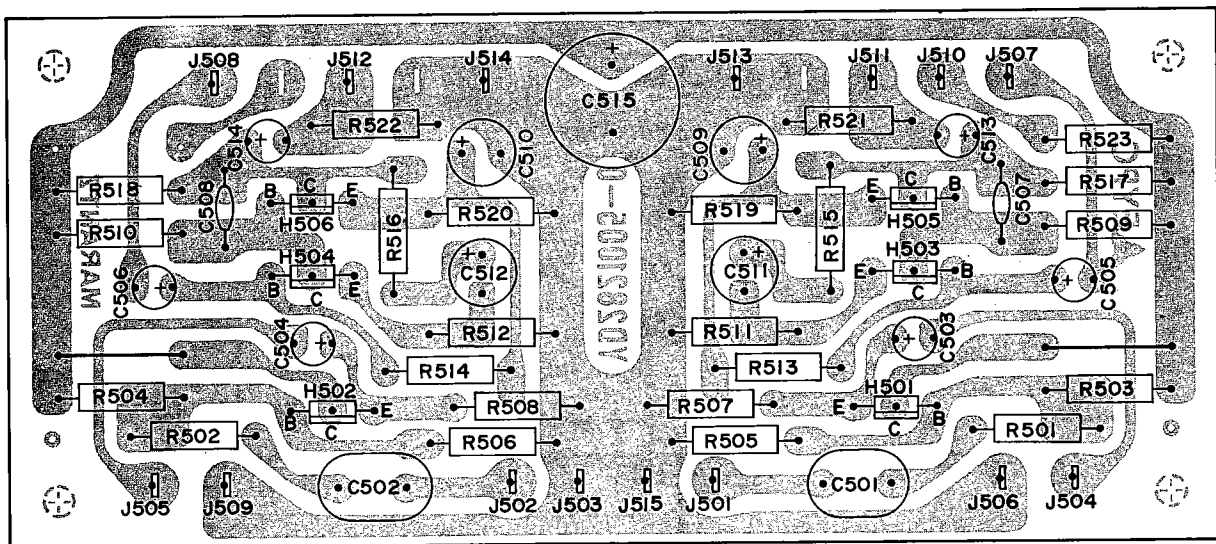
Tone and Pre Amplifier Assembly P500 Component Locations
